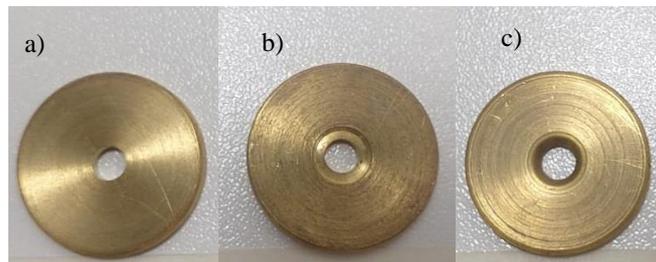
Orifice plates manufactured to the present work: a) sharp edge orifice plate b) sharp edge recessed orifice plate and c) quadrant edge orifice plate.
